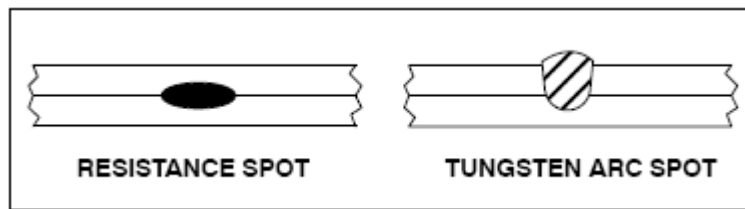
Resistance spot and tungsten arc spot welding [7]
